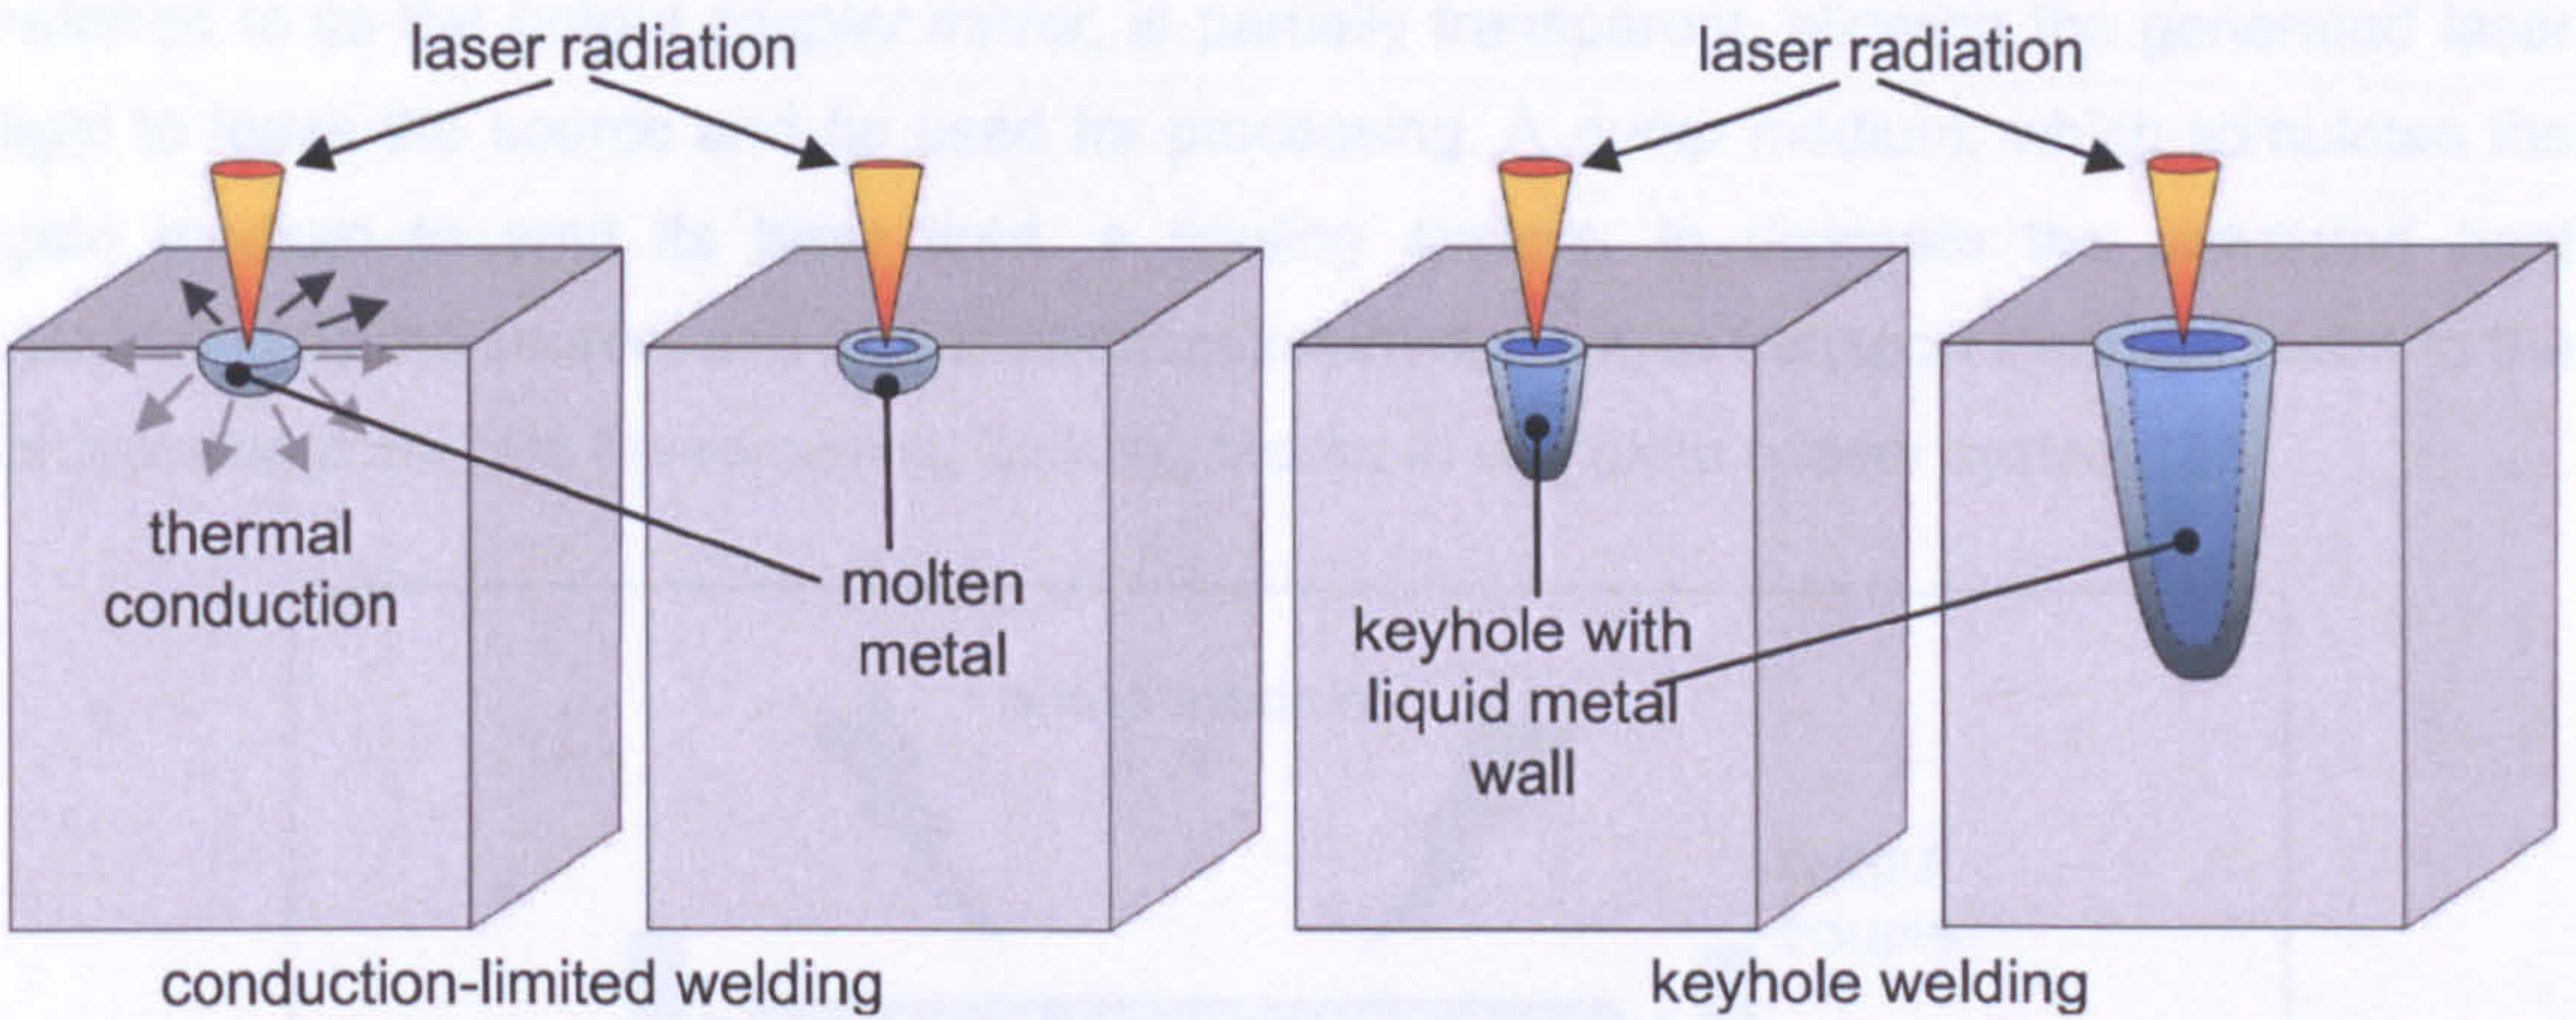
The principle of laser welding, from conduction-limited to keyhole welding (51)
